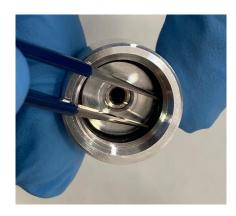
Seating an incorrectly placed gasket with tweezers.
